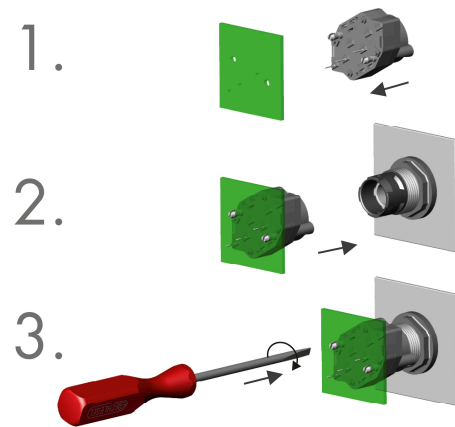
PCB-mounting with bolt for CZ... contact elements
